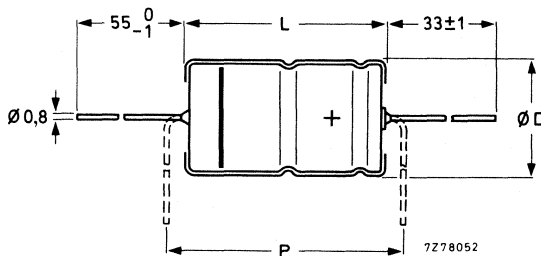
Case sizes 00, 01, 02 and 03. For dimensions D, L and P, see Table 1.
